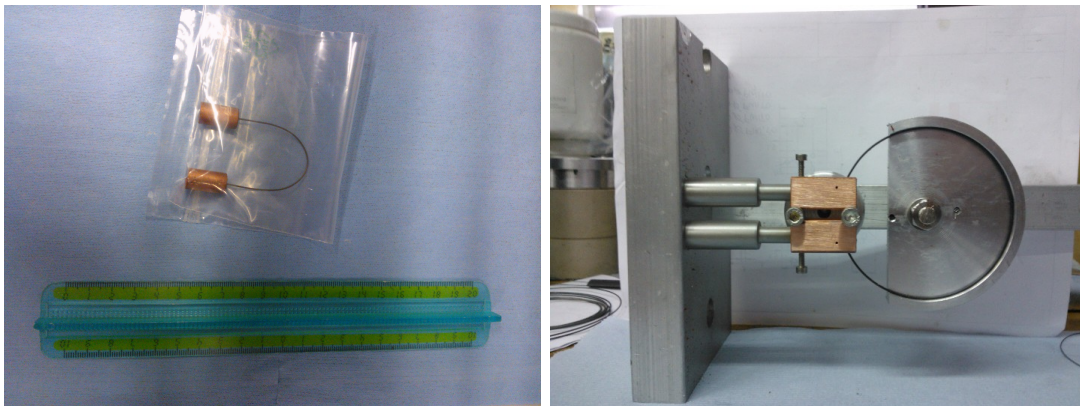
Wire made of thoriated tungsten (left); tools to weld the tungsten wire to the copper blocks (right)
